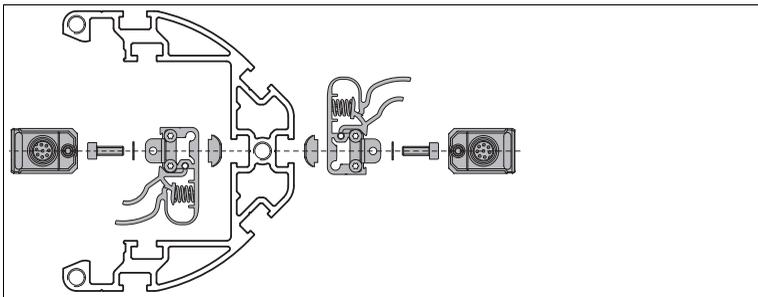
Example of mounting a mounting aid OMH-SLCT-01 to a mounting column
